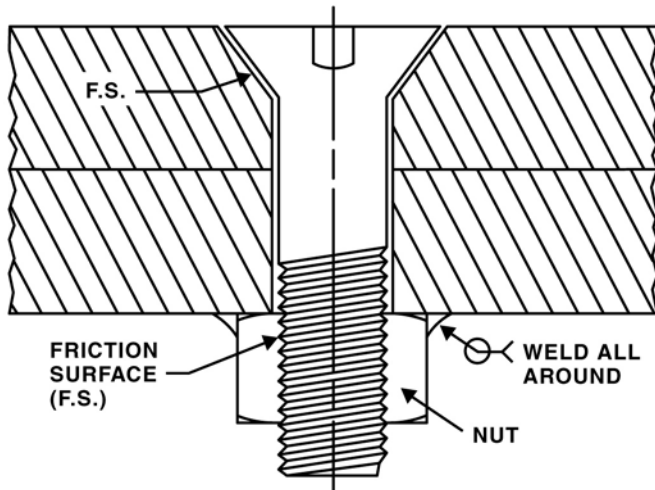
Schematic of a Typical Alloy Steel Flat Socket Screw in an Expansion Joint Assembly
